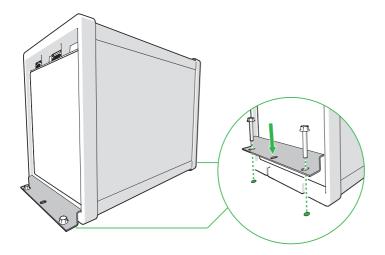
Installing the Li-ion battery using the Whisper Power mounting brackets
